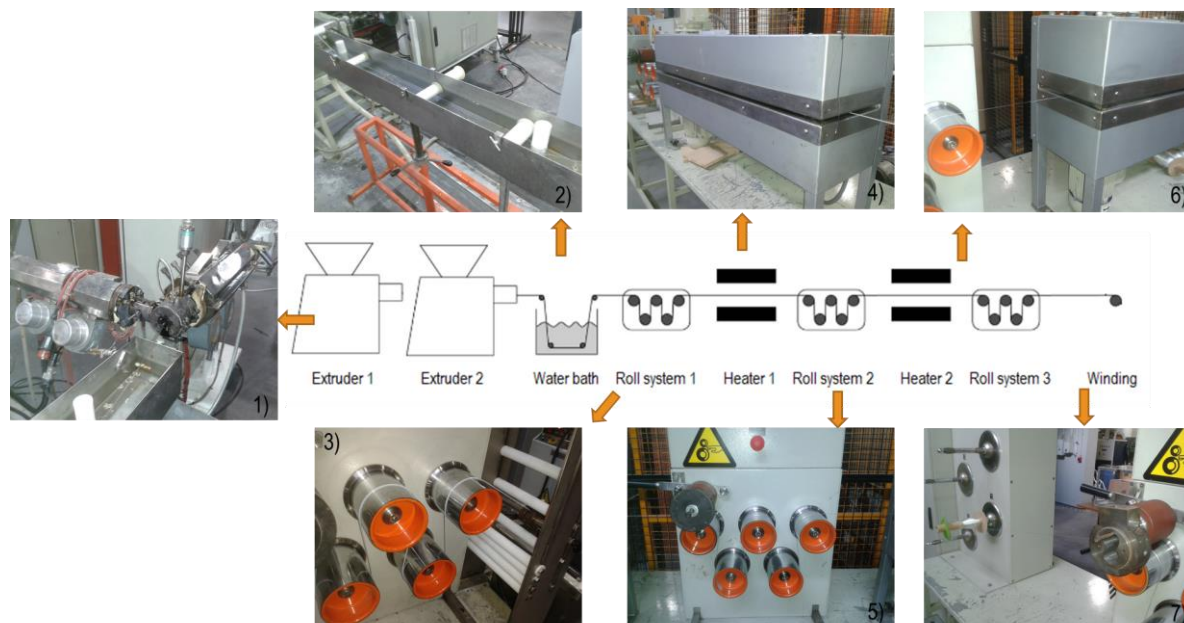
Scheme of the coextrusion line - 1) two extruders are linked to one die, 2) cooling system, 3) roll system 1, 4) heater 1 and roll system 2, 5) roll system 2 and heater 2, 6) heater 2, 7) roll system 3 and winding
